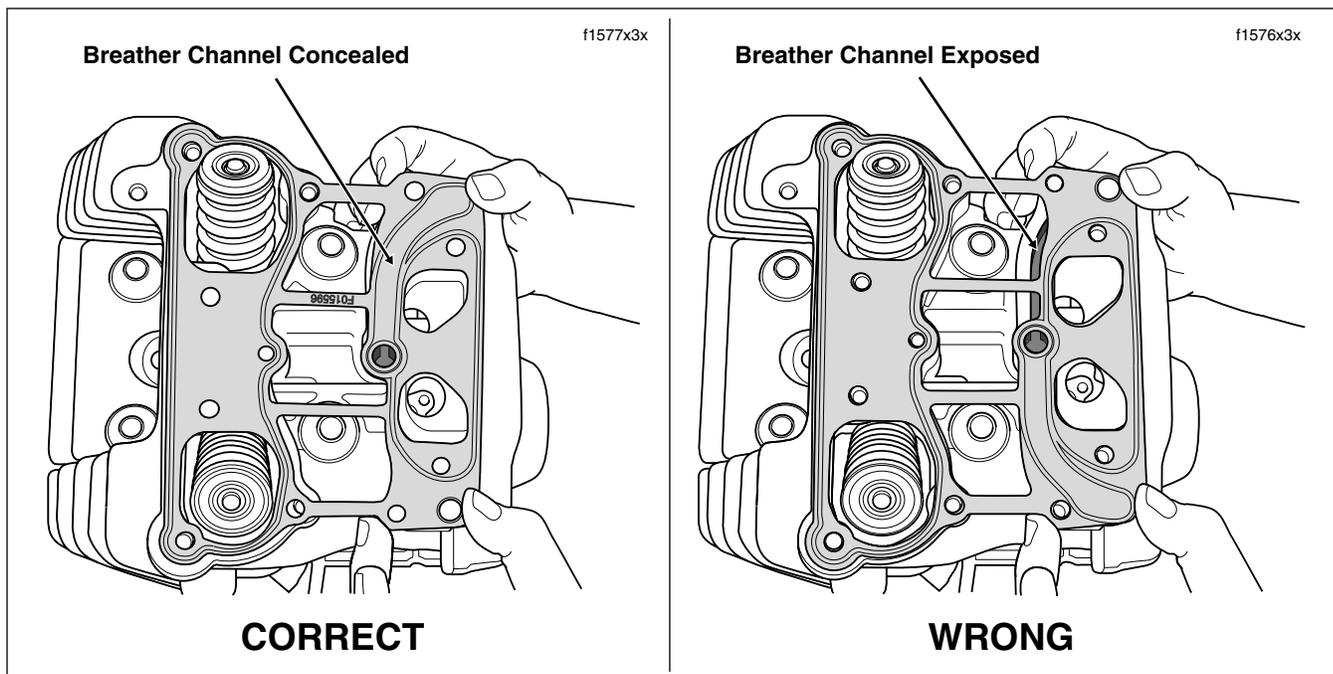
Install Rocker Housing Gasket (Rear Cylinder Shown)
